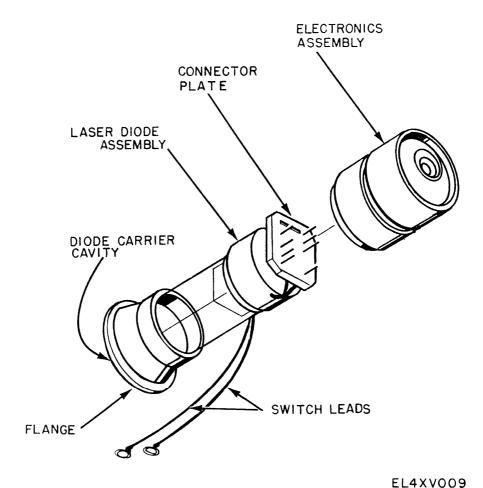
Electronic assembly, laser diode carrier assembly.
